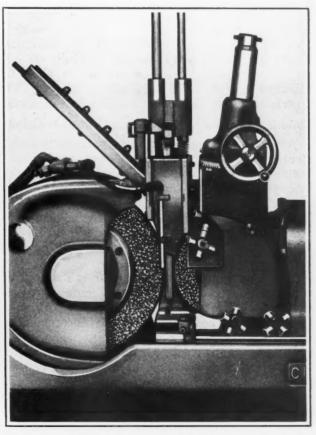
Grinding Universal Joint Spider with Duplex Wheels on a Centerless Machine
